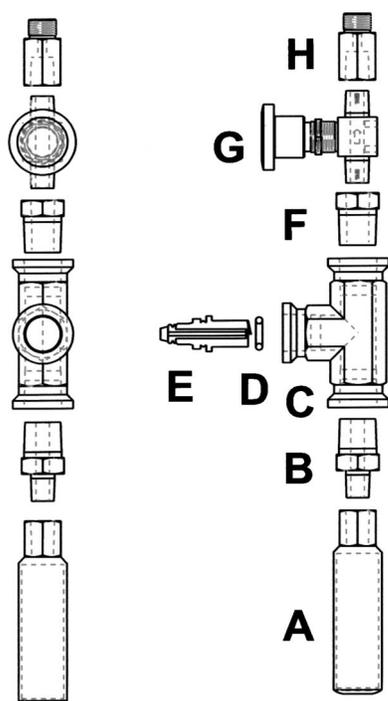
Exploded drawing of the spark combustion reactor showing top and side perspectives. The reactor components are (A) 25 ml reactor cylinder with NPT port; (B) adapter 0.25–0.5 in. NPT port; (C) 0.5 in. NPT tee; (D) Viton O ring; (E) platinum electrode spark plug with M14-1.25 thread; (F) bushing 0.5–0.25 in. NPT port; (G) steel bellows valve with 0.25 in. NPT ports; (H) adapter 0.25 in. NPT to VCO port. Each NPT port connection is sealed with PTFE tape.
